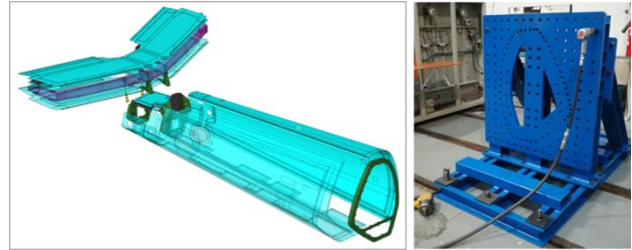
Rootless full scale test specimen and main support jig for static testing.
